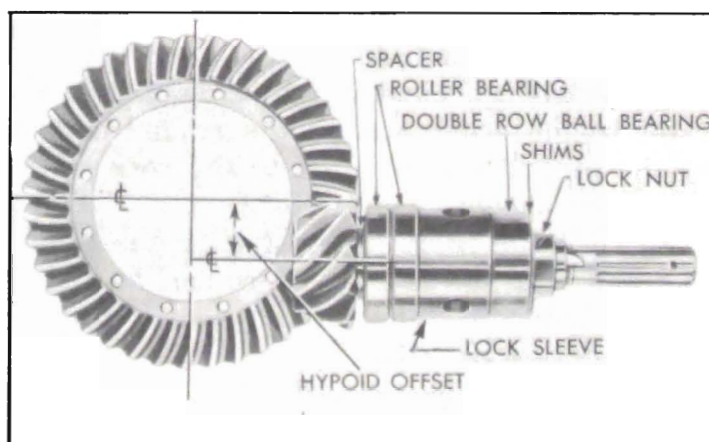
Gear Set with Bearings and Lock Sleeve—1949 Model
